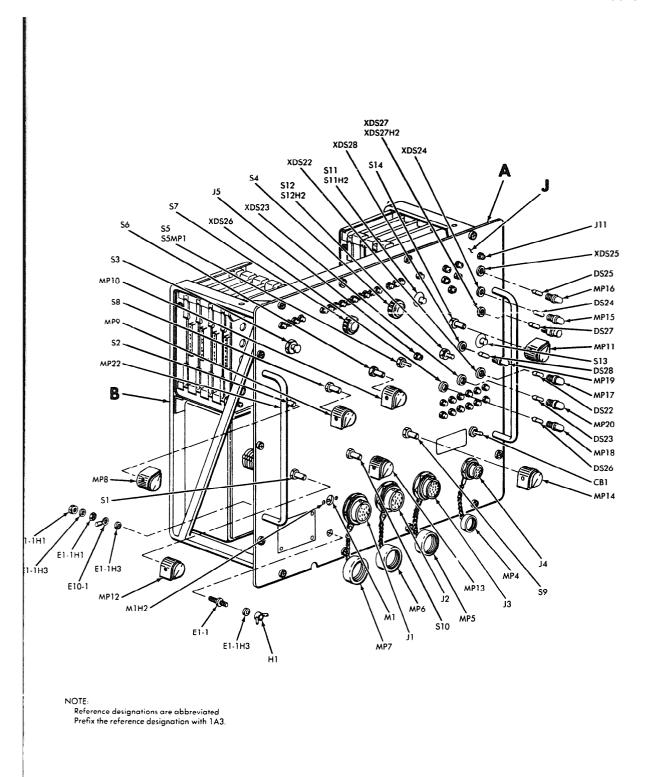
(1). Test set panel assembly 1A3, location of parts (sheet 1 of 7).
